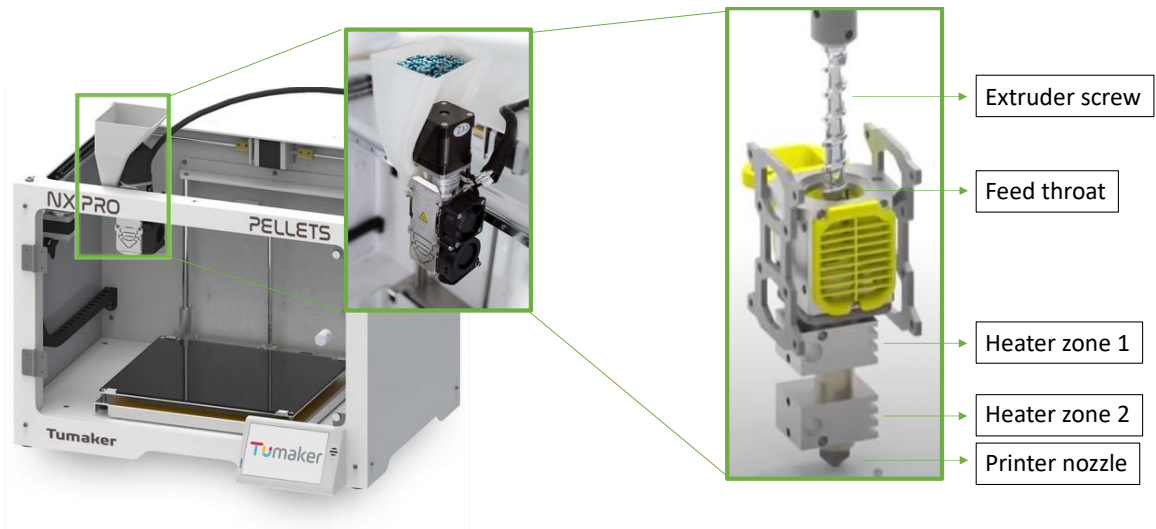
Small scale pellet printer with exploded view of the print head extruder assembly. Print head has two heater zones, one close to the feed throat while the other close to the nozzle.
